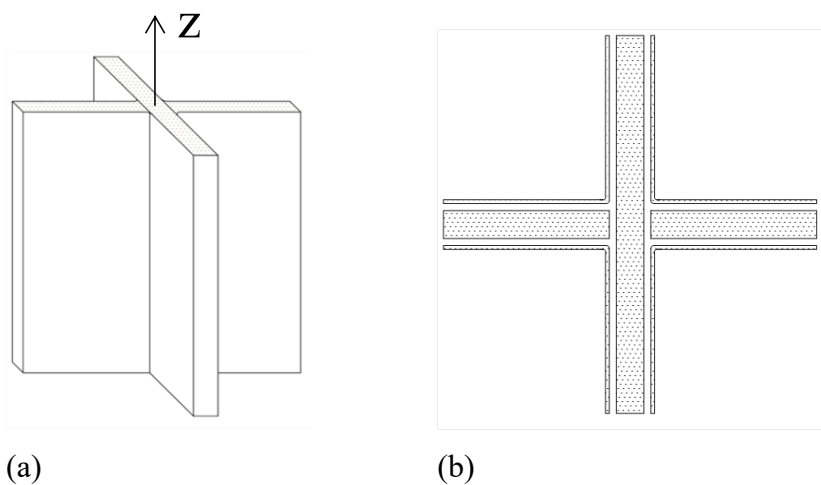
(a) 3D view of the cruciform prism, (b) Cruciform prism with stiffener plies.
